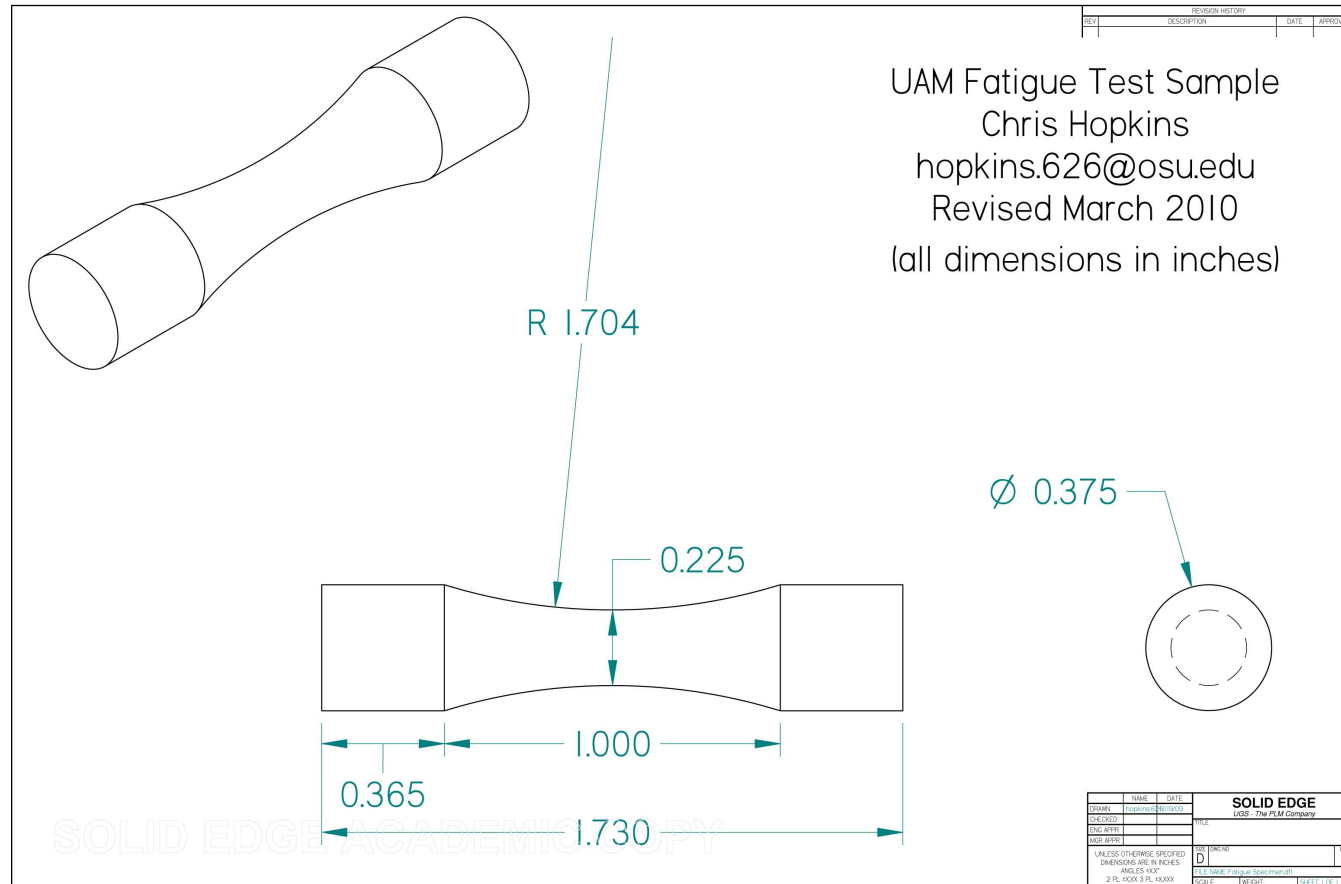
Nominal dimensions for fatigue samples. All dimensions in inches.
